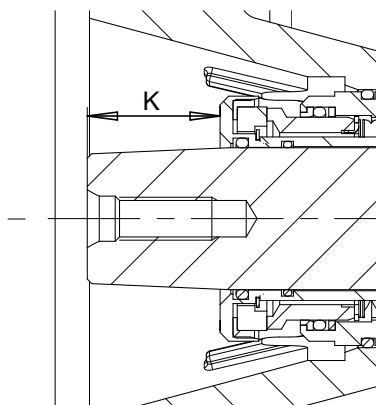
Reference dimension "K" from shaft end to mechanical seal
